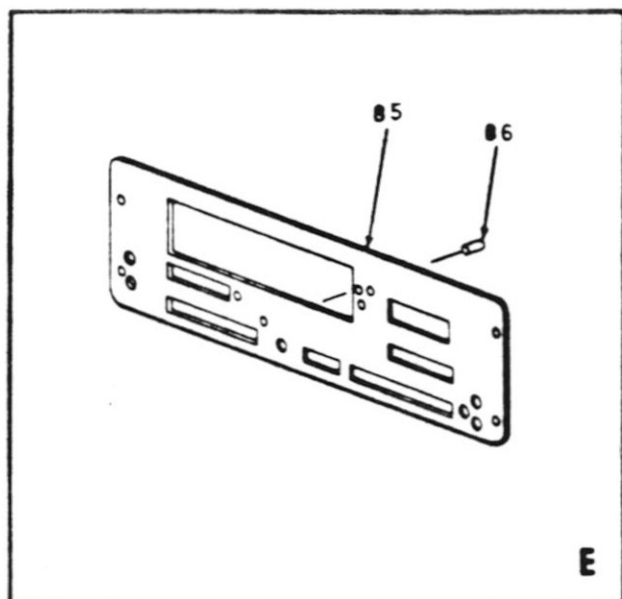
DPAV Exploded View (Sheet 4 of 5)
